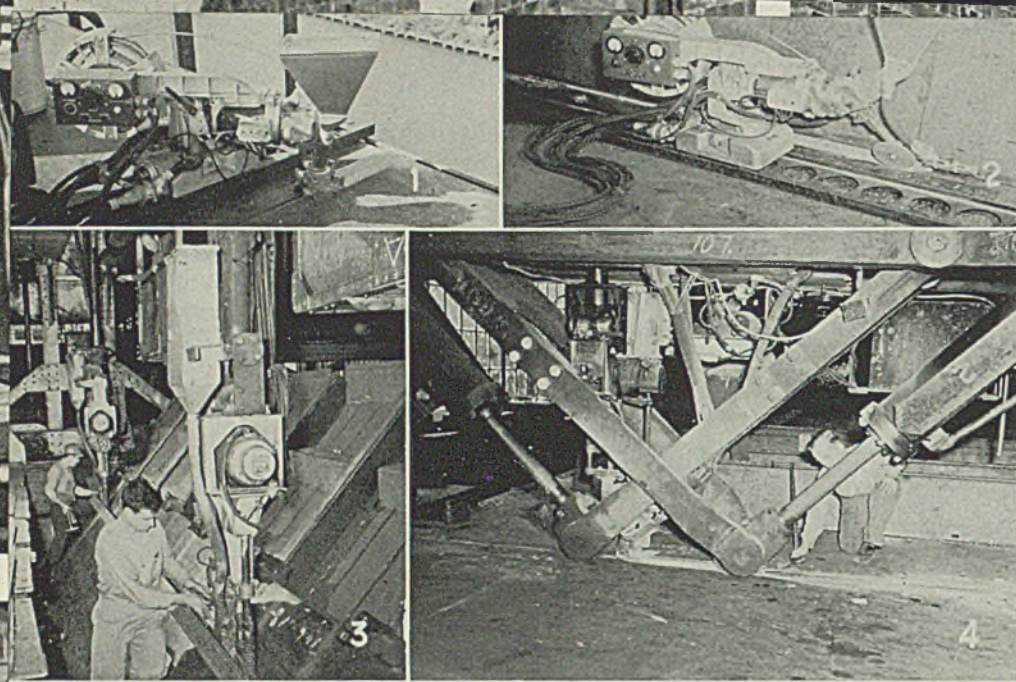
Unionmelt welding process joining 1¼-inch plate in just one pass using approximately 2000 amperes
